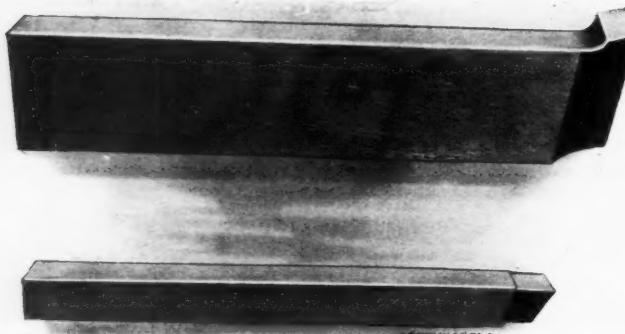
Ready Tools with Stellite Cutters arc- and butt-welded to Machine Steel Shanks
